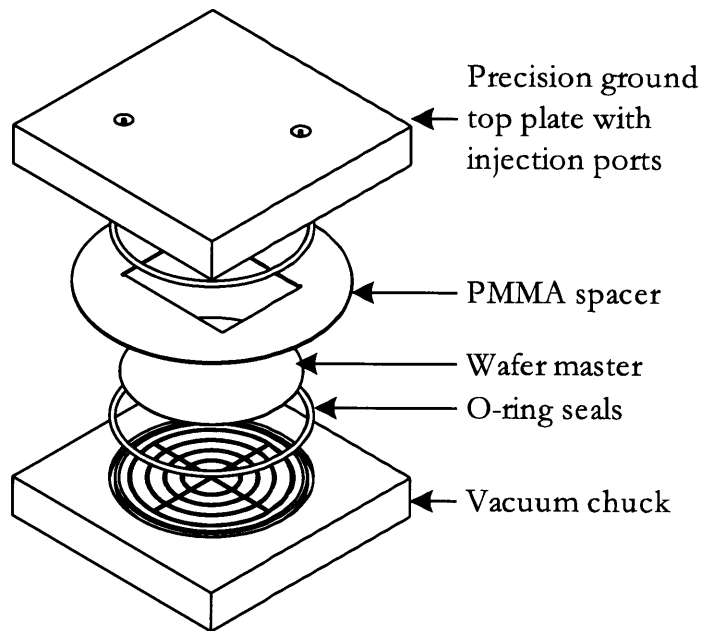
Mold used for casting stamps; fastening hardware, ejection port, and integrated heater omitted for clarity. The PMMA spacer defines the exact profile and thickness of each stamp, while the wafer imparts the stamp feature geometry.
